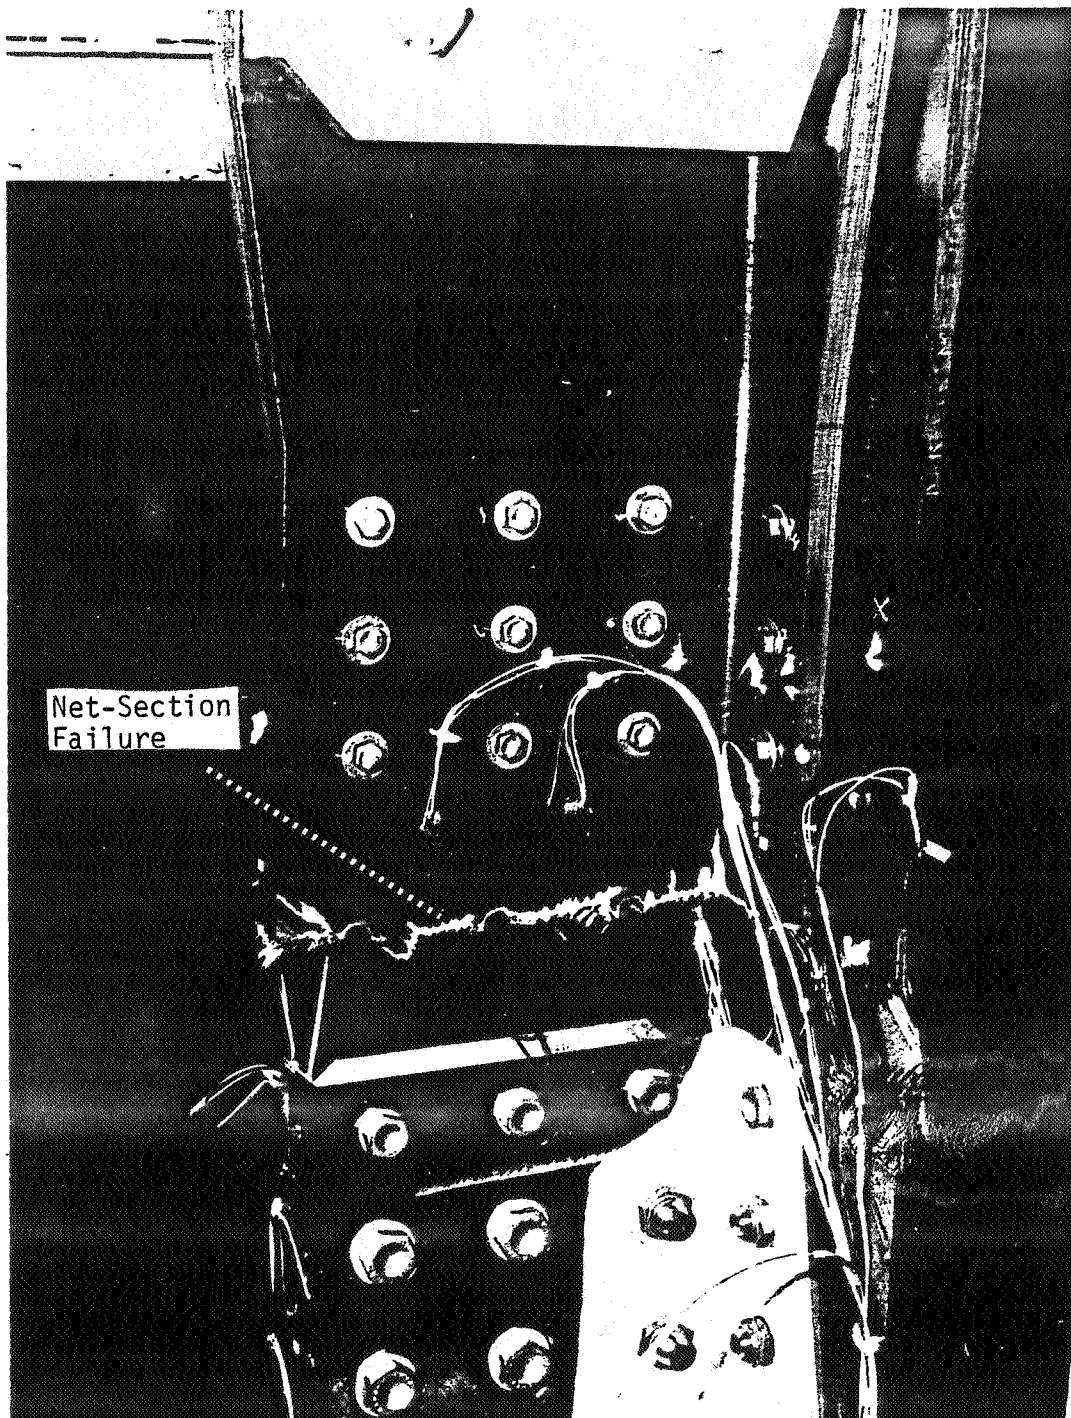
TECHNOLOGY DEMONSTRATION - TEST SECTION FAILURE
